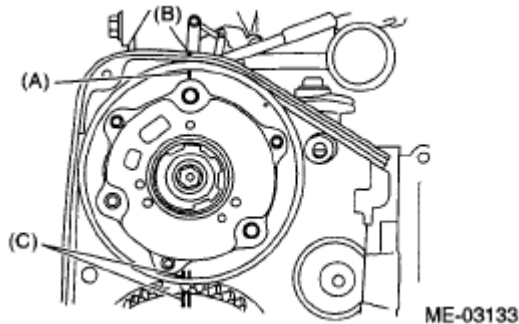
Identifying Intake Cam Sprocket Mark And Timing Belt Cover Notch
